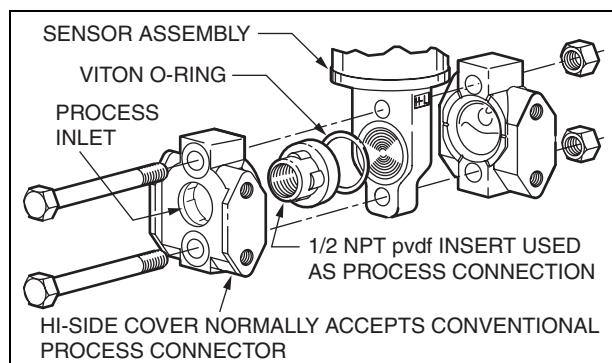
Bracket-Mounted Transmitter Shown with 1/2 NPT pvdf Insert Installed in HI-Side Cover
